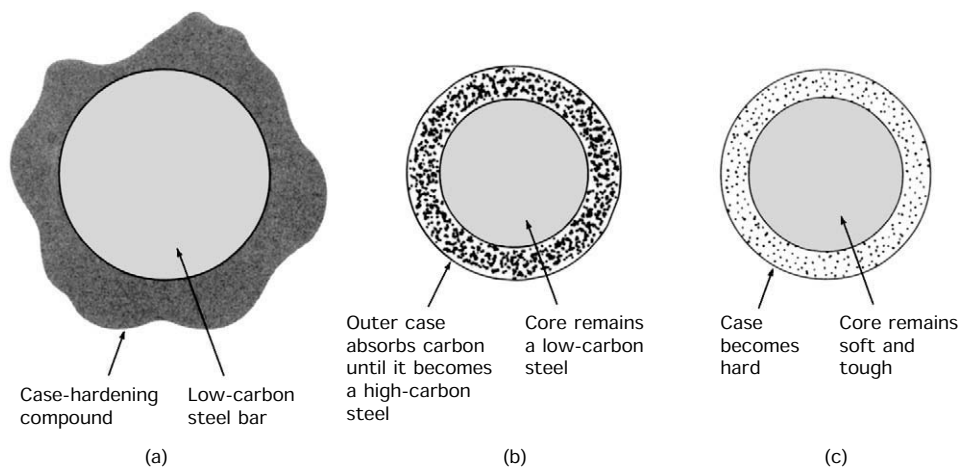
Case hardening: (a) carburizing; (b) after carburizing; (c) after quenching a component from a temperature above 780°C
